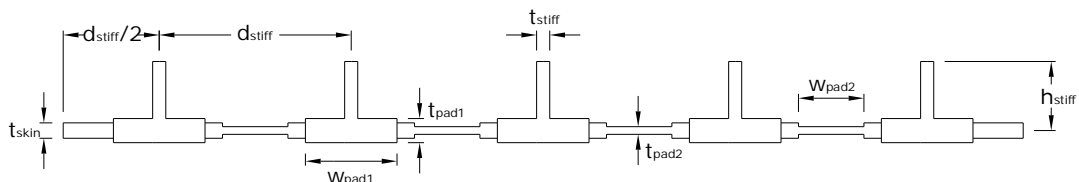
Straight stiffened plate and pads under stiffeners and between stiffeners
